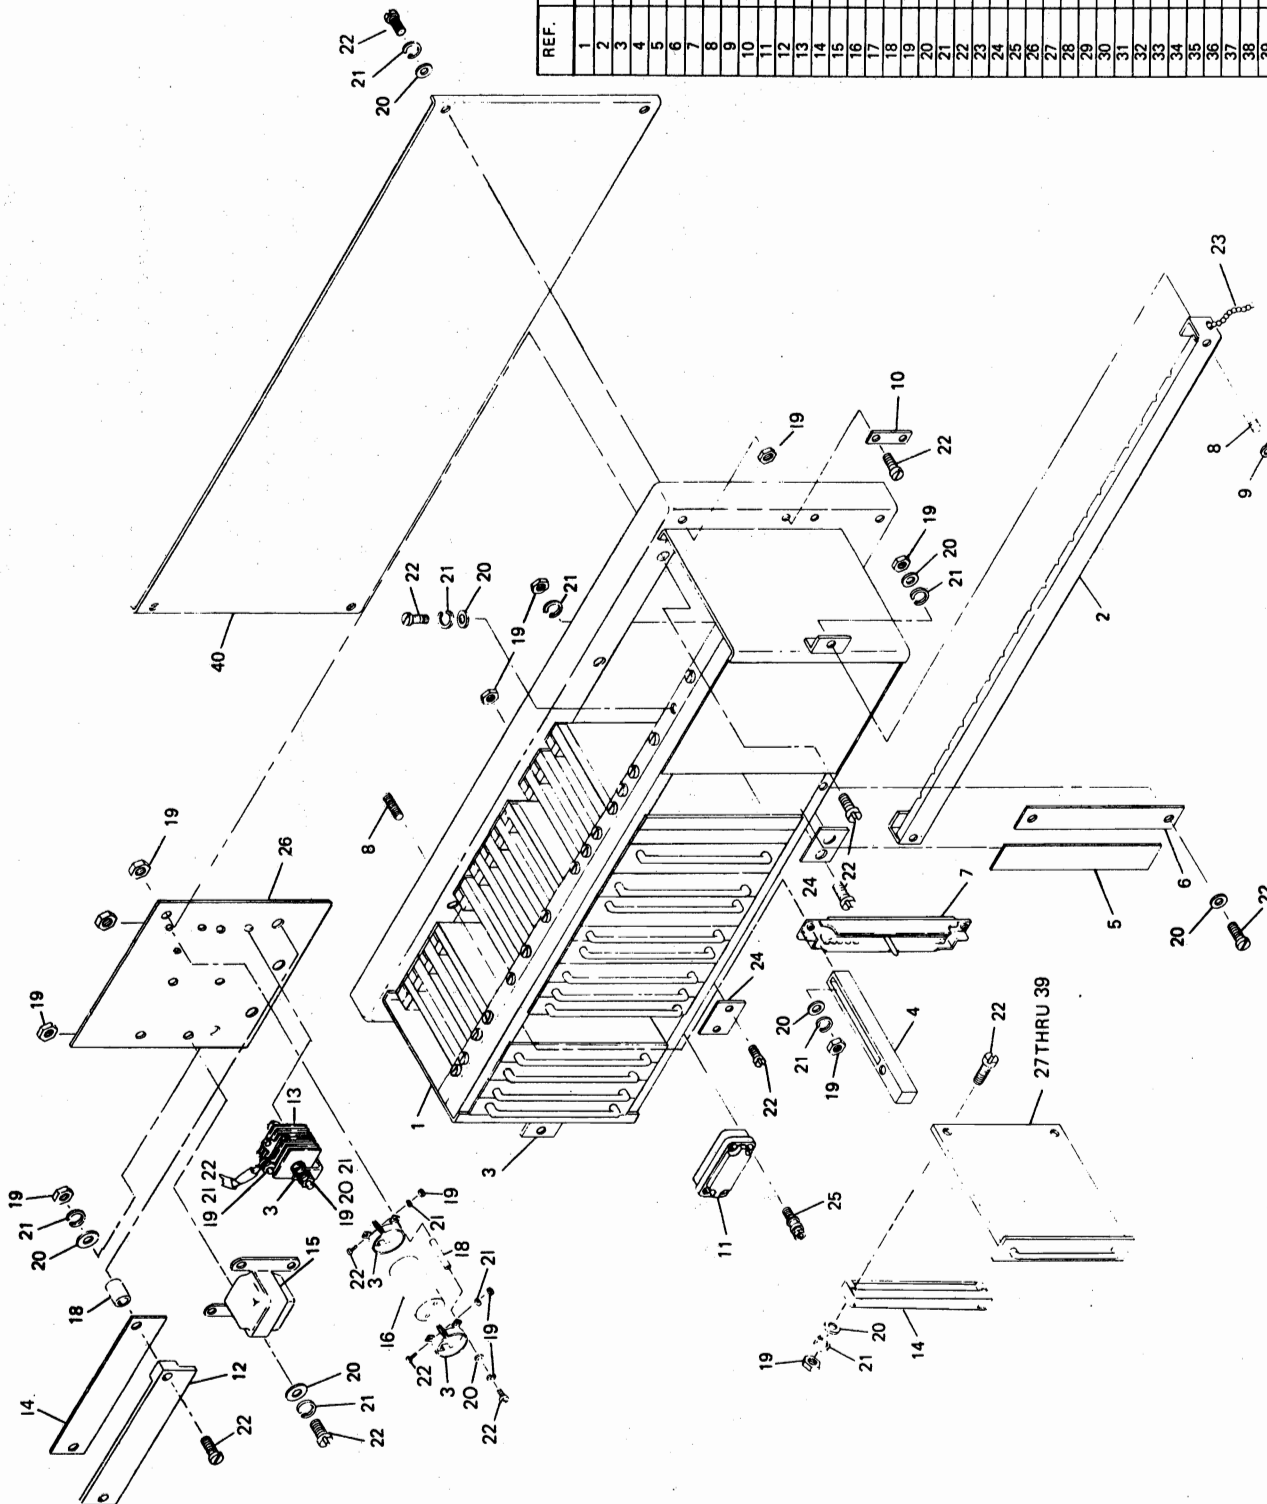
EXPLODED VIEW FL134 PANEL. E-19645
